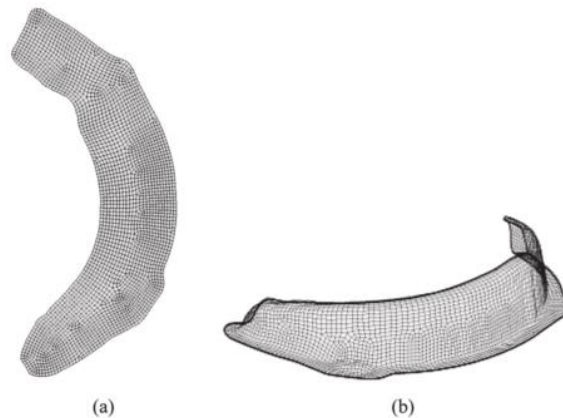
An optimised blank shape post forming from Gronostajski et al. (2004). The large regular blank holder area after forming suggests the size of the blank has not been minimised.
